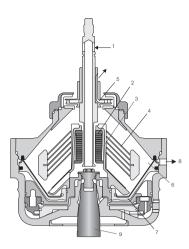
Typical bowl drawing for solids-ejecting separator. Drawing details do not necessarily correspond to the centrifuge described.
